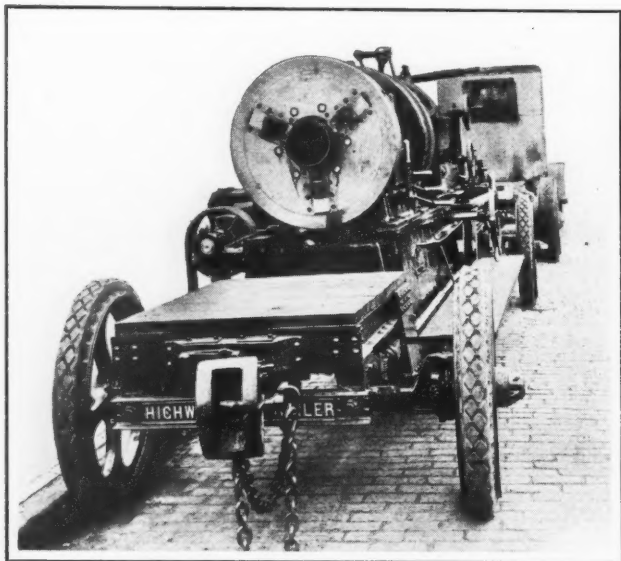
End View of Outfit, showing the Chuck and Operator's Platform
